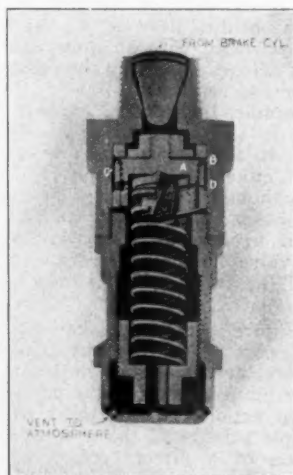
HIGH-SPEED REDUCING VALVE.
